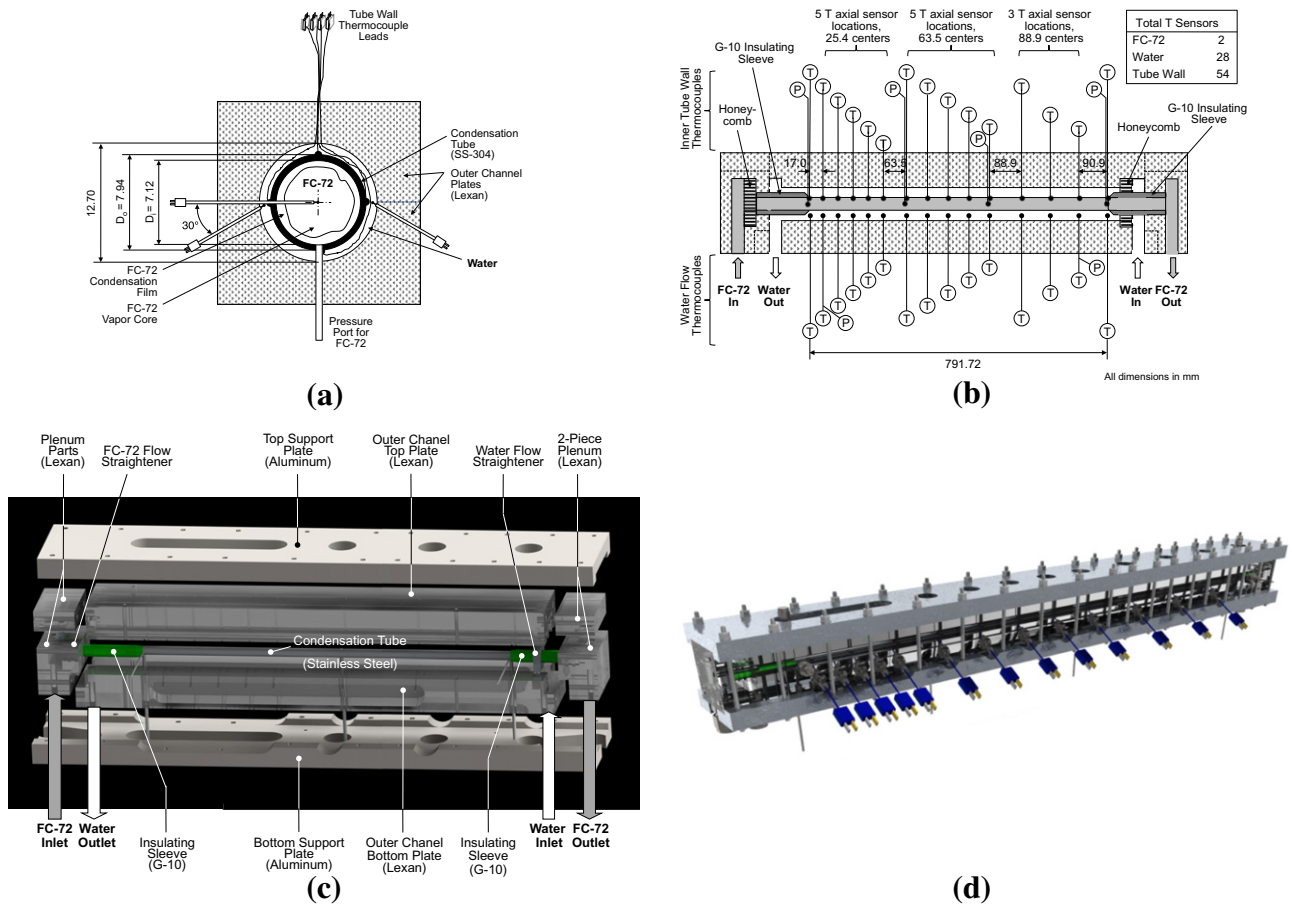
Construction of condensation module CM-HT for heat transfer measurements: (a) cross-sectional diagram, (b) longitudinal sectional diagram, (c) CAD model of module parts, and (d) CAD model of module assembly with instrumentation.
